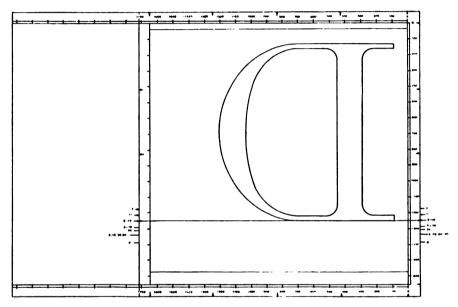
Grant-Legros process; enlarged drawing of character.
